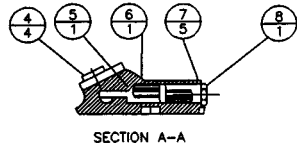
Oil Pump Accessory Drive Housing Drain
